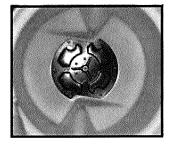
Verify that the holes of the mixing drum, the plate assembly and rubber pad are properly aligned.
